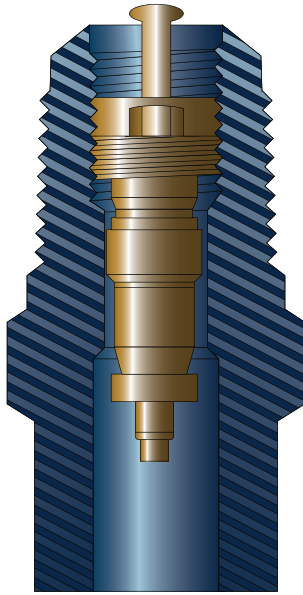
Cross-section of an R12 refrigerant service valve.
